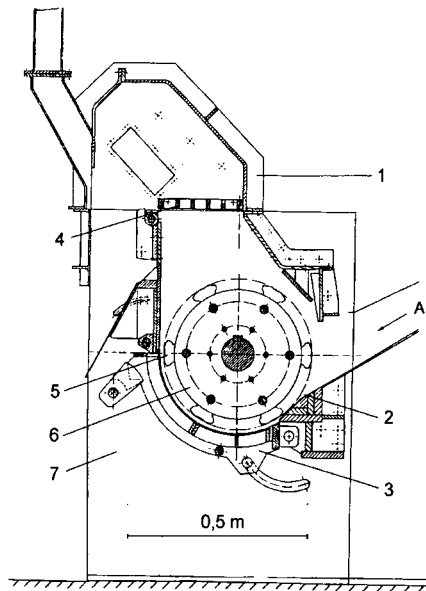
Cross-section of the small-scale horizontal shaft shredder. 1: housing; 2: anvil; 3: lower part of housing - flap; 4: upper part of housing-discharge grate, baffle plates; 5: impacting tool - hammer; 6: rotor; 7: discharge.
